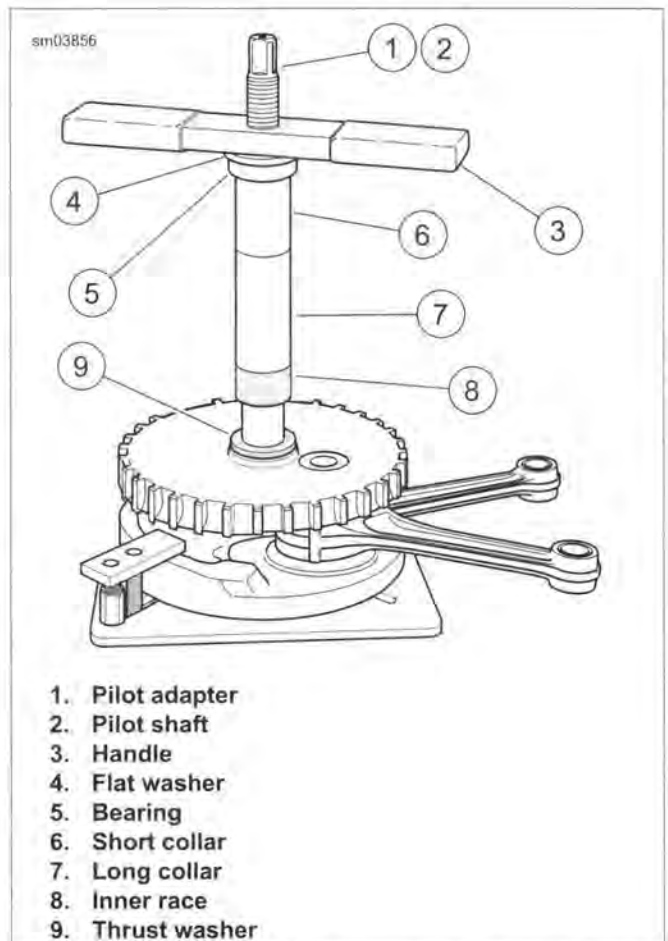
Press Inner Race onto Sprocket Shaft: Setup
